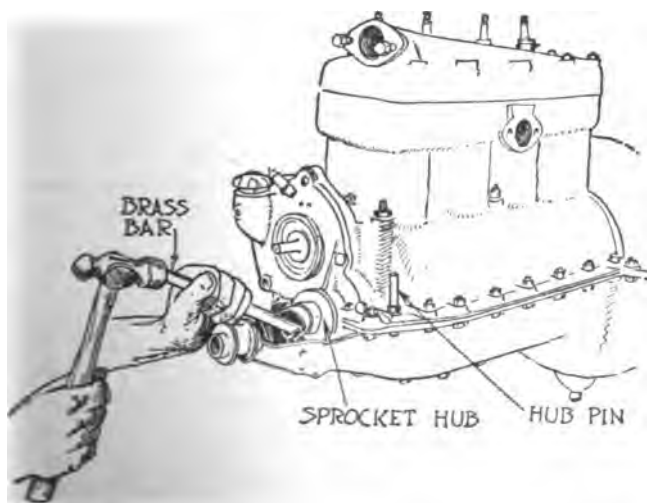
Mounting the Westinghouse driving sprocket on the engine crankshaft
